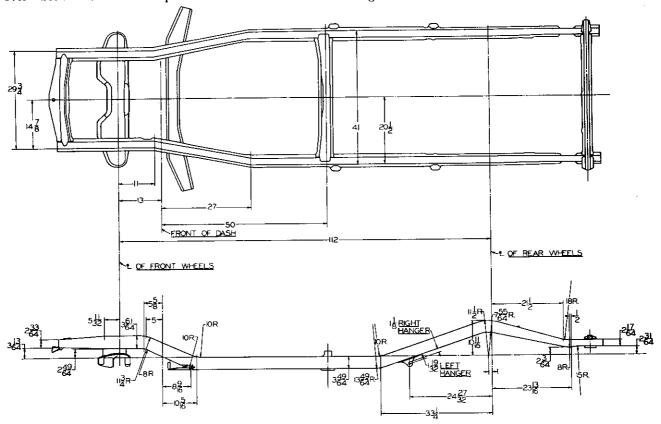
CHAMPION CHASSIS FRAME DIMENSIONS
